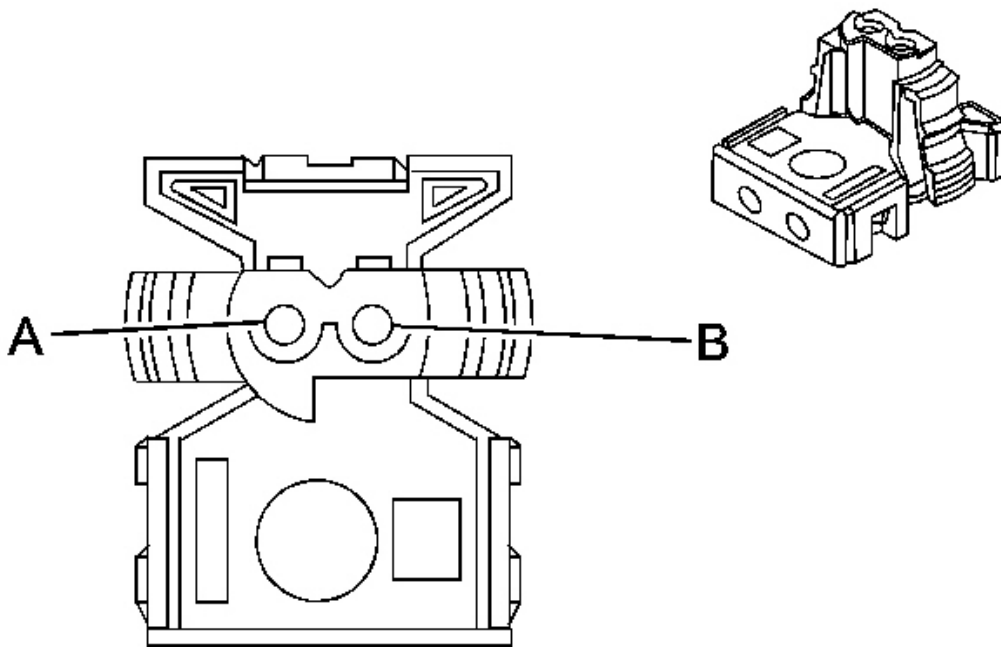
Inflatable Restraint Steering Wheel Module C2 Connector End View
